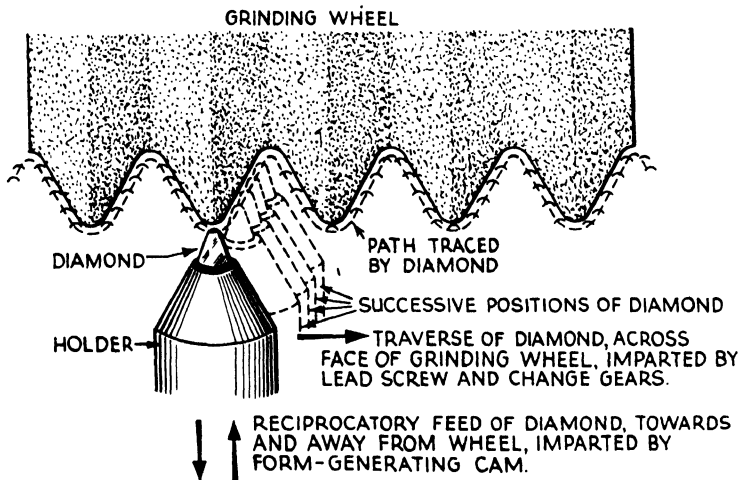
PATH OF DIAMOND ACROSS WHEEL FACE, USING MATRIX PATENT MULTI-RIBBED WHEEL-DRESSING DEVICE
